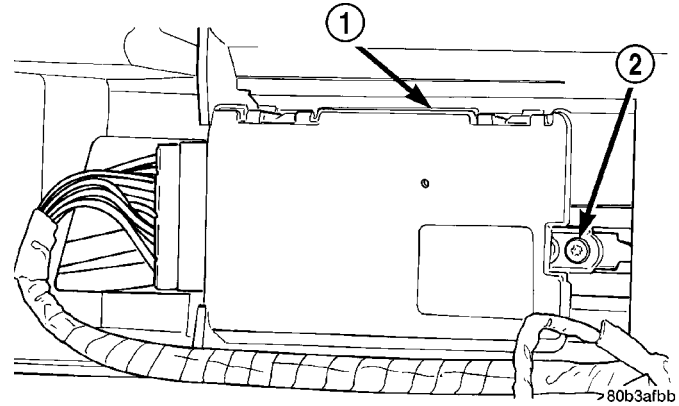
SUNROOF DRIVE MOTOR AND EXPRESS MODULE
